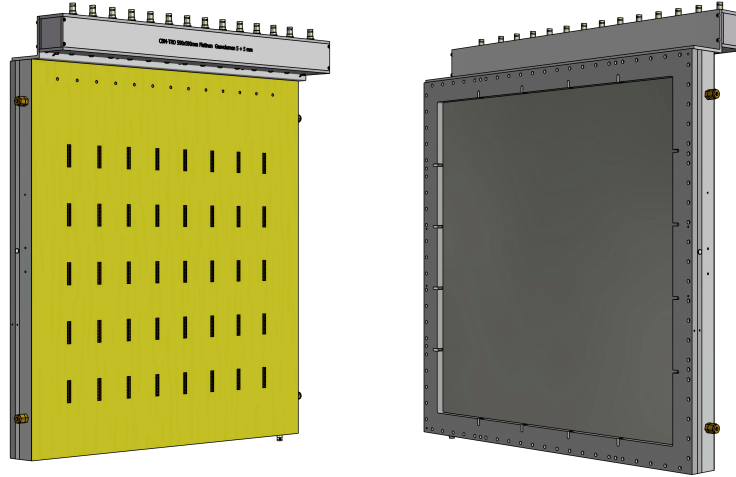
Front (right) and rear (left) view of the prototype with 13 HV cables. A HV box is designed for the 13 HV cables on top of the chamber.
